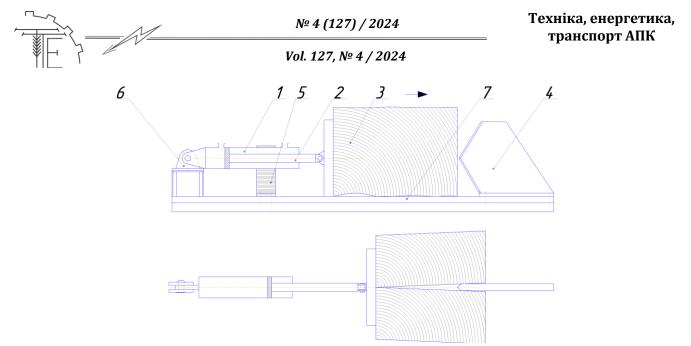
Operation of the hydraulic Shredder: 1 – Hydraulic cylinder; 2 – hydraulic cylinder rod; 3 – block of wood; 4 – a knife; 5 – retainer; 6 – bracket; 7 – guide.
